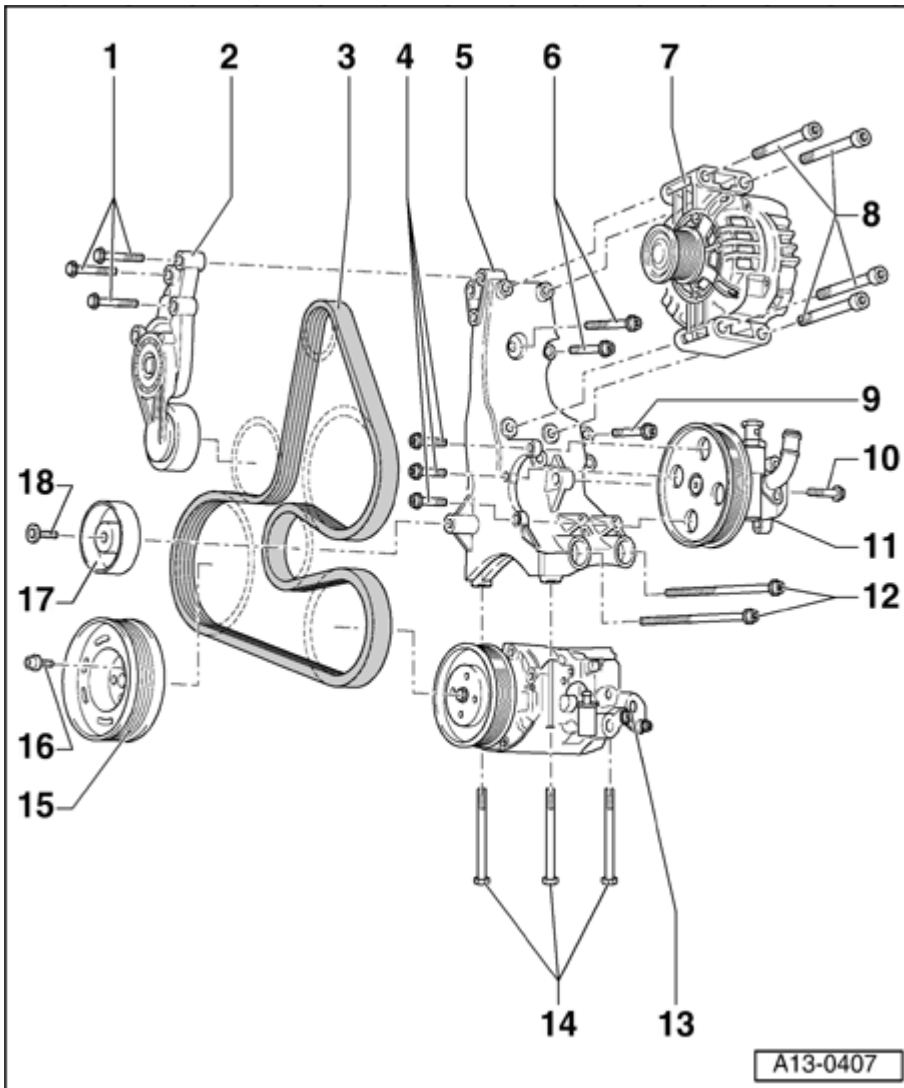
Ribbed Belt For Generator, Vane Pump And Air Conditioner Compressor Remove/Install Components
